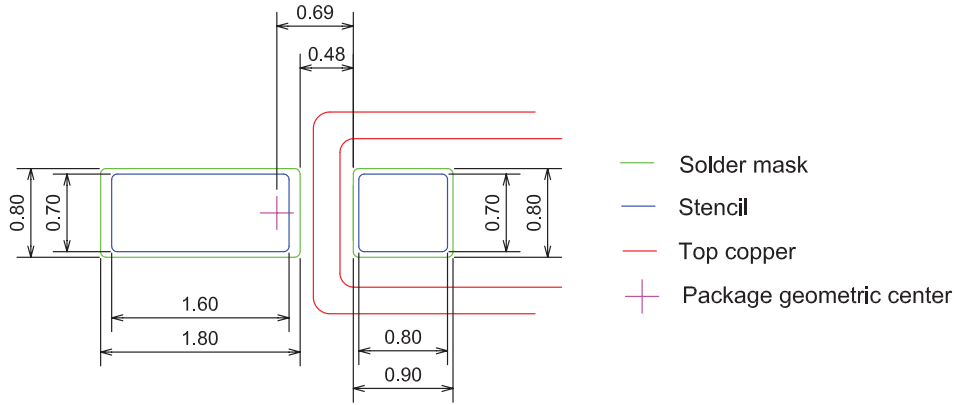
Recommended PCB solder pad layout for LUXEON 3014.
